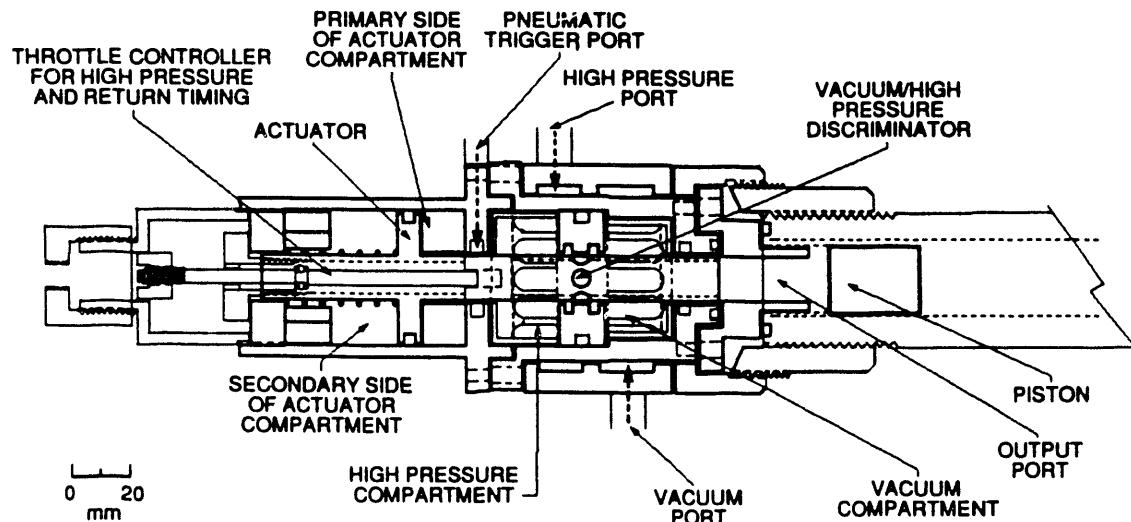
Pressure/vacuum mechanical valve-type controller.
